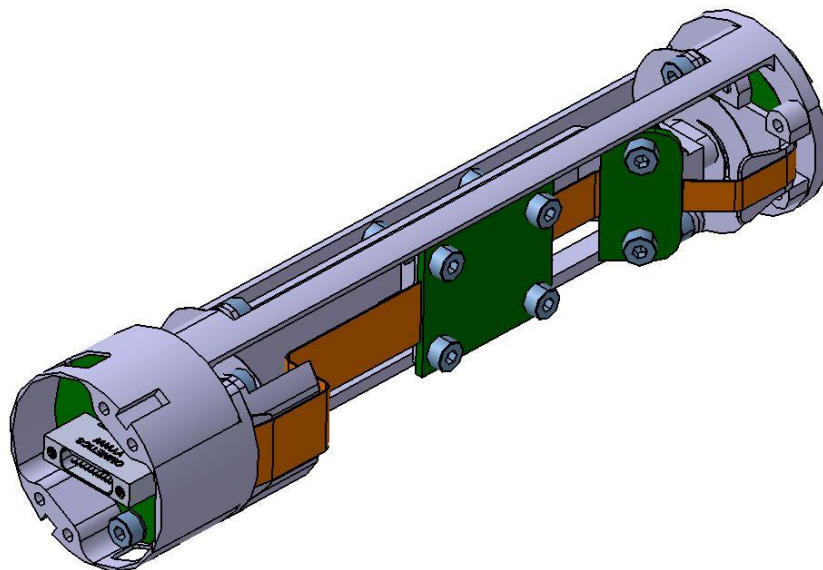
Assembly of TEM-A foils and covers to Outer casing
